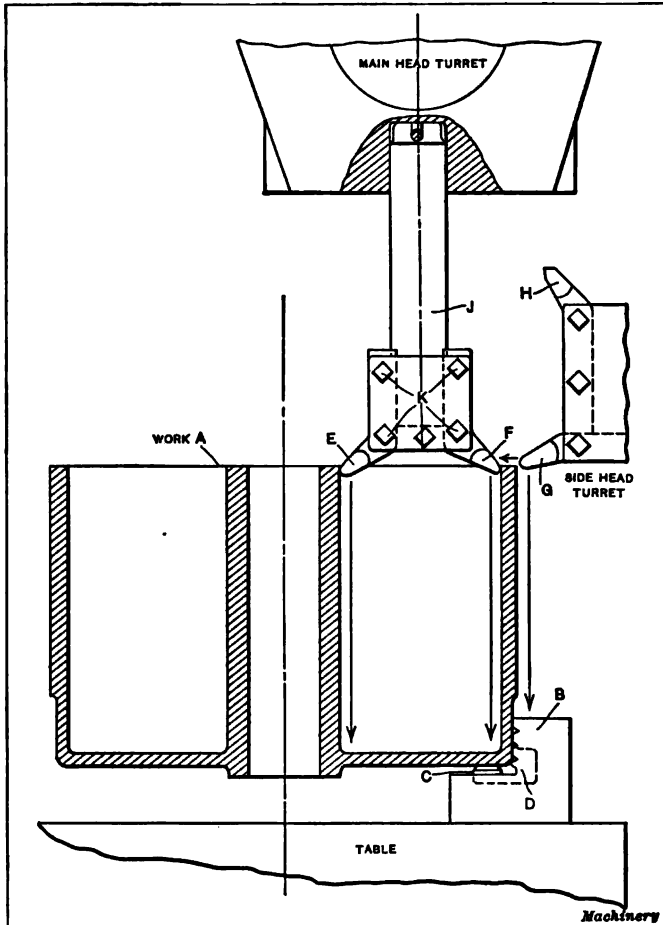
Another Thin Casting Machined in the Vertical Turret Lathe
